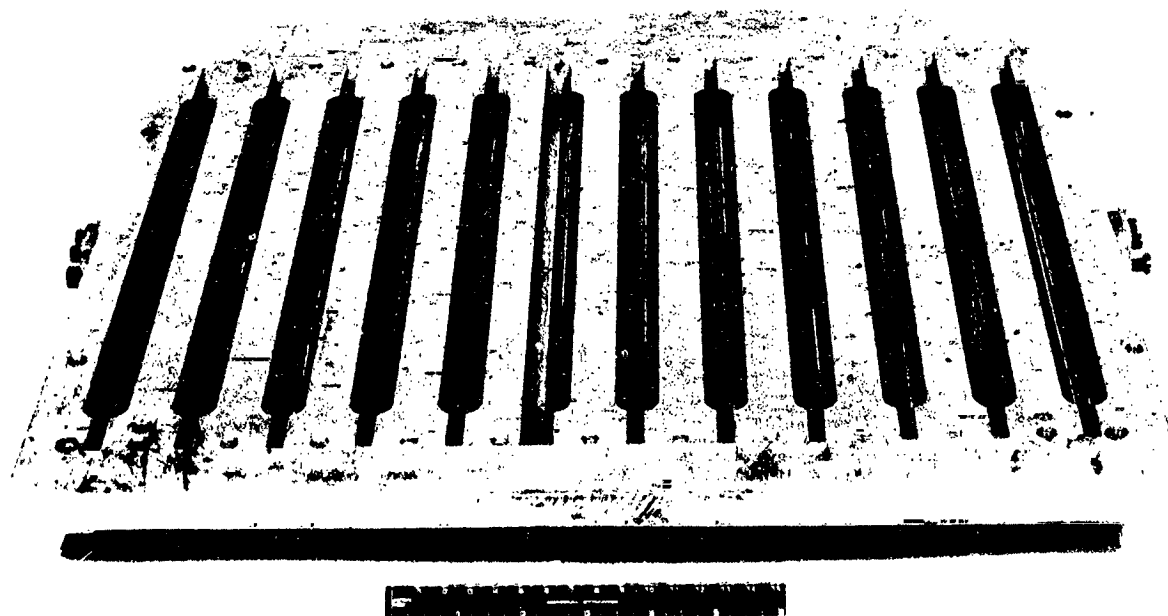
Welding Fixture for Tee-Stiffened Heat Shield Panel — Skin to Rib Weld (137278)
